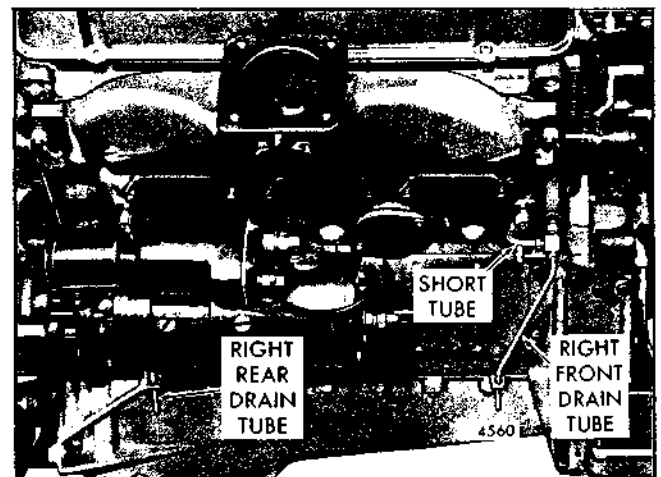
Air Box Drain Tube Mounting (8V Engine)
